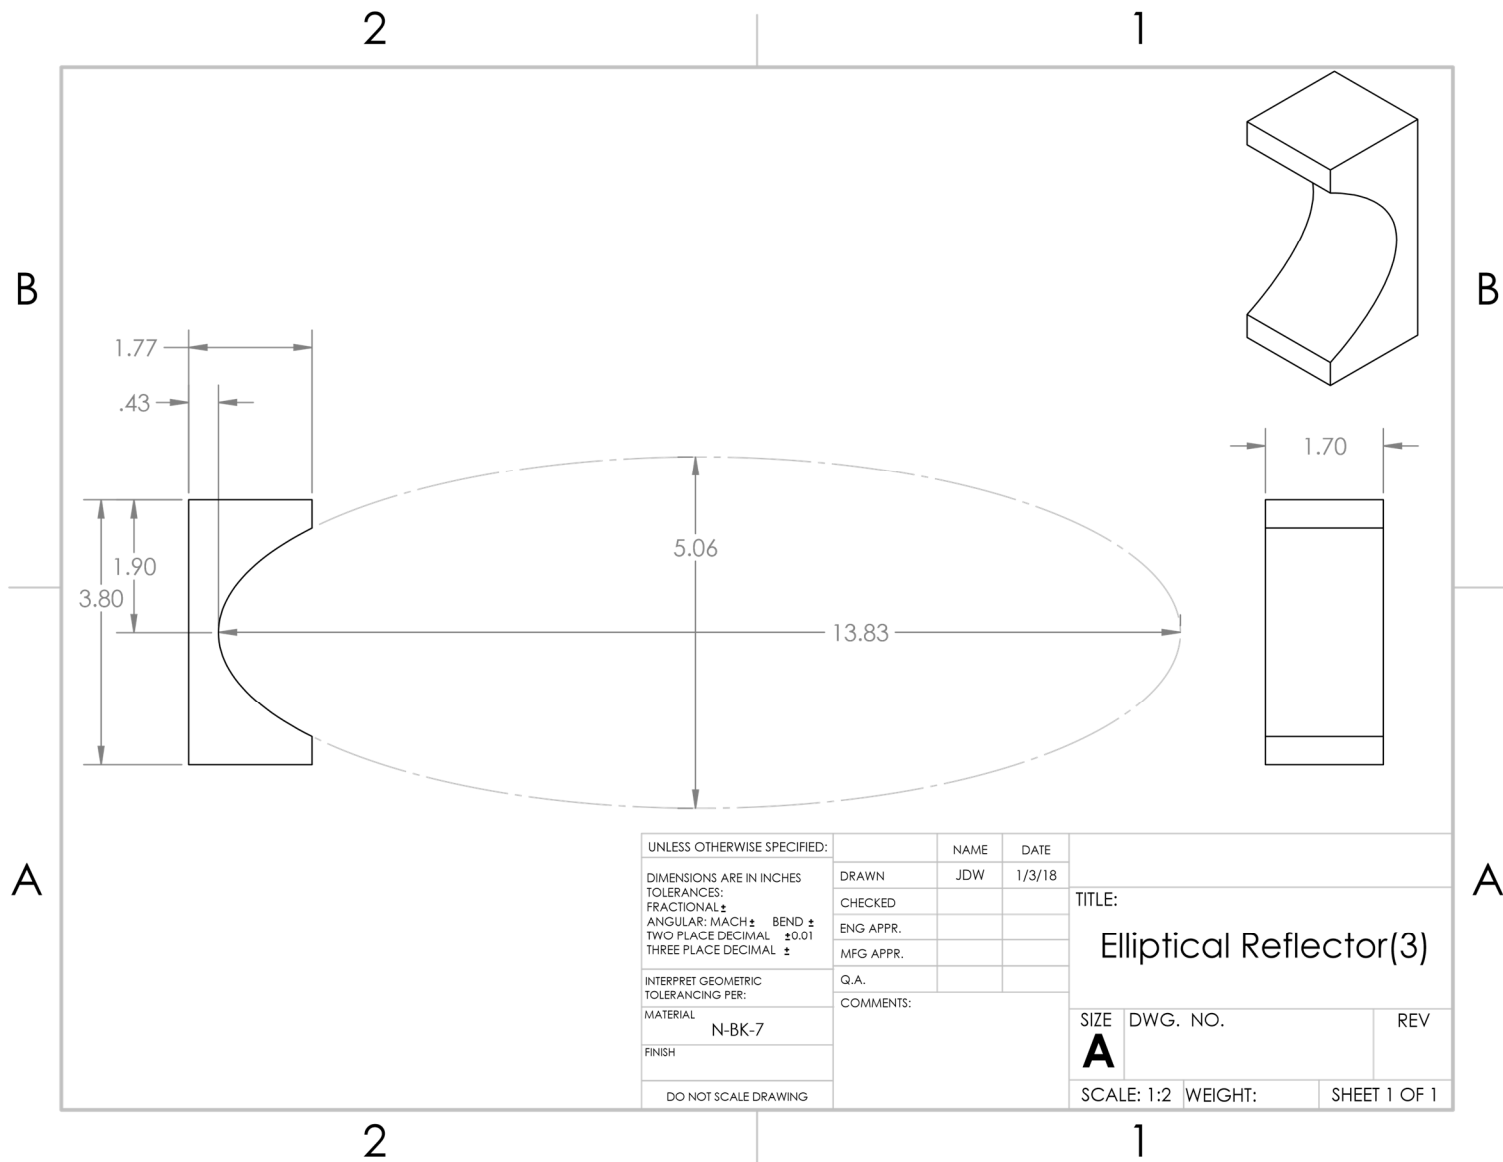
Flashlamp Elliptical reflector Machine Drawings
